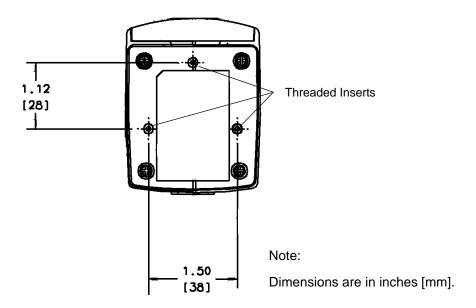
Symbol MS1204FZY/MS2204/MS2204VHD Mounting Dimensions
